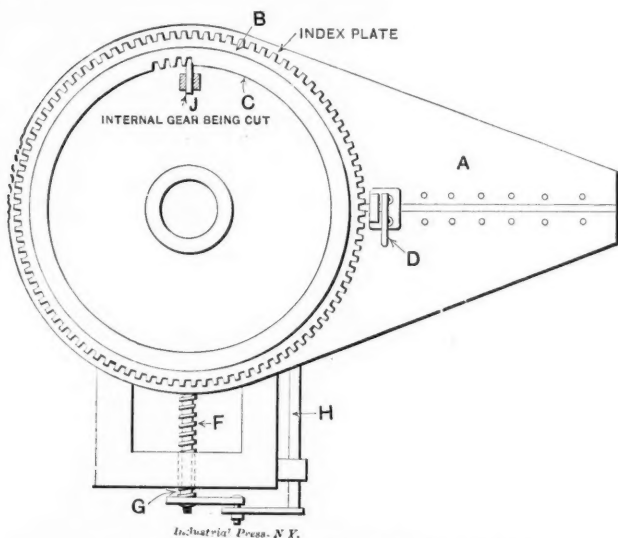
Cutting Internal Gear Teeth of Boring Mill Tables.
